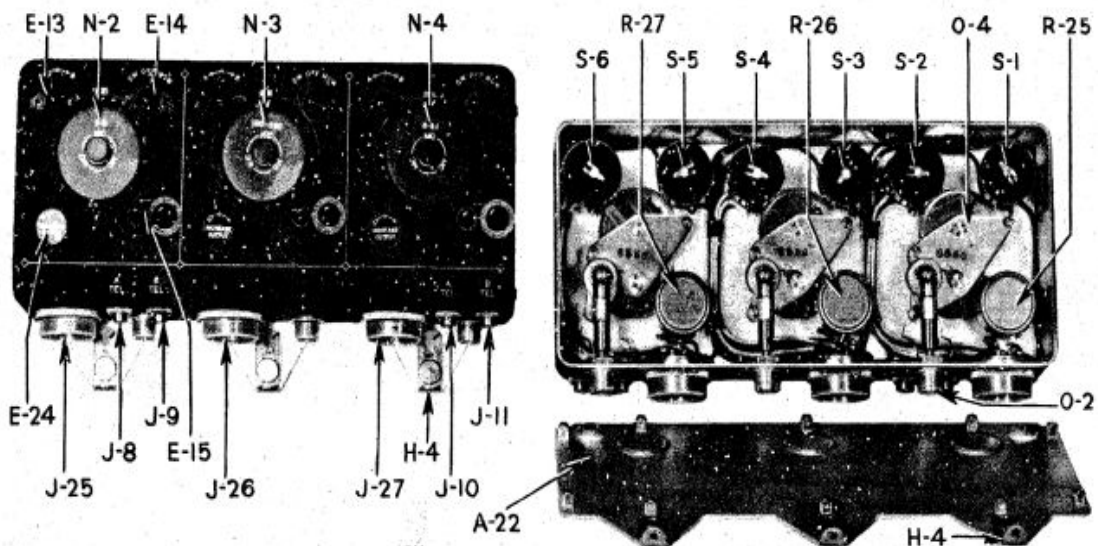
TYPE CBY-23251 RECEIVER CONTROL BOX (3-UNIT), FRONT VIEW, AND REAR VIEW, WITH COVER REMOVED
